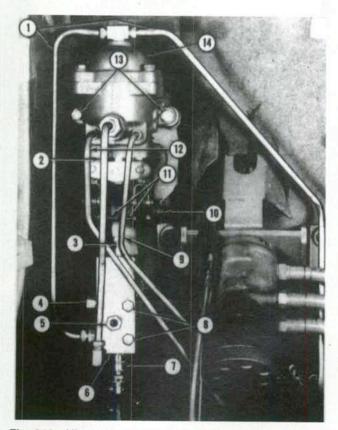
View of power brake valve and differential lock valve on Model TW-35.
